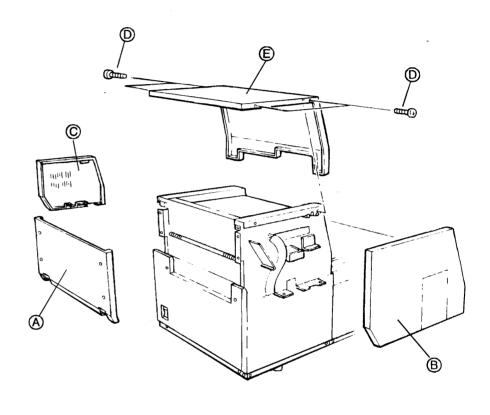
Removing Top Cover of IS520 Upper Unit
